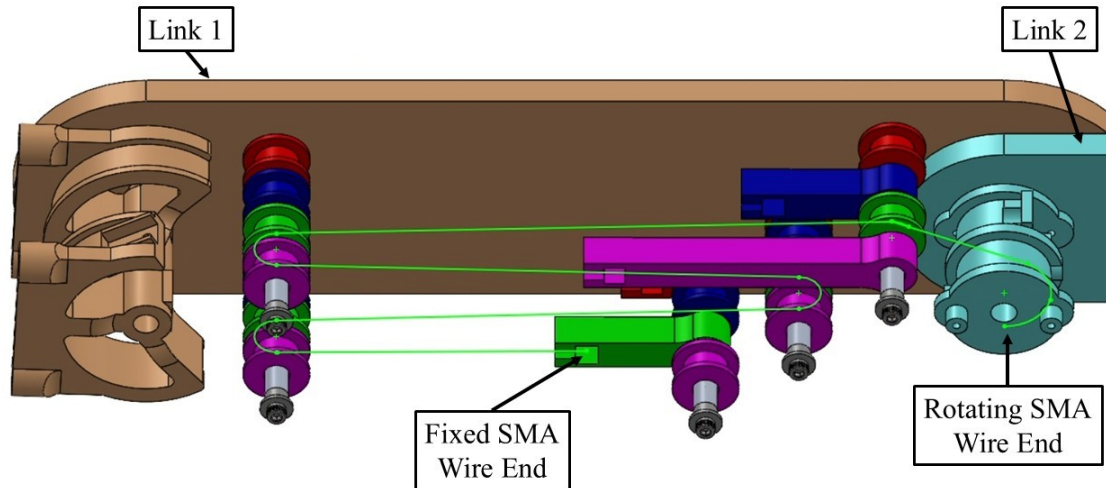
Link 1 assembly showing link 1 and 2 components, wire rollers, and fixed wire ends. The path of the joint 2 counterclockwise (CCW) actuator is shown in green.
